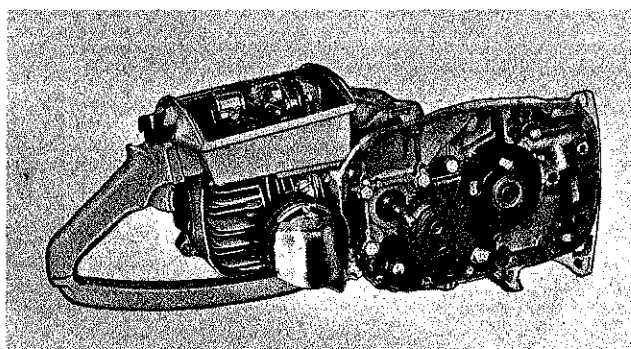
When the gearcase cover is removed, all elements of the transmission are exposed for inspection and service. Before removal of the cover, tap the bar mounting bolts out of the gearcase and remove the sprocket and sprocket shaft key.
